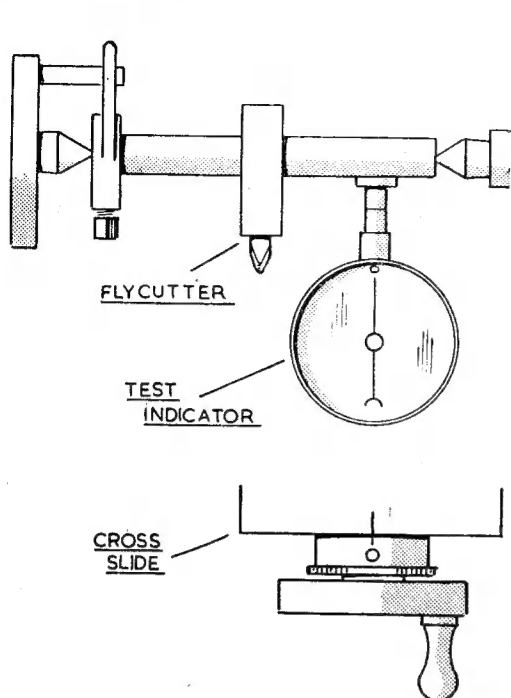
Obtaining the zero setting of the cross-slide and test indicator
